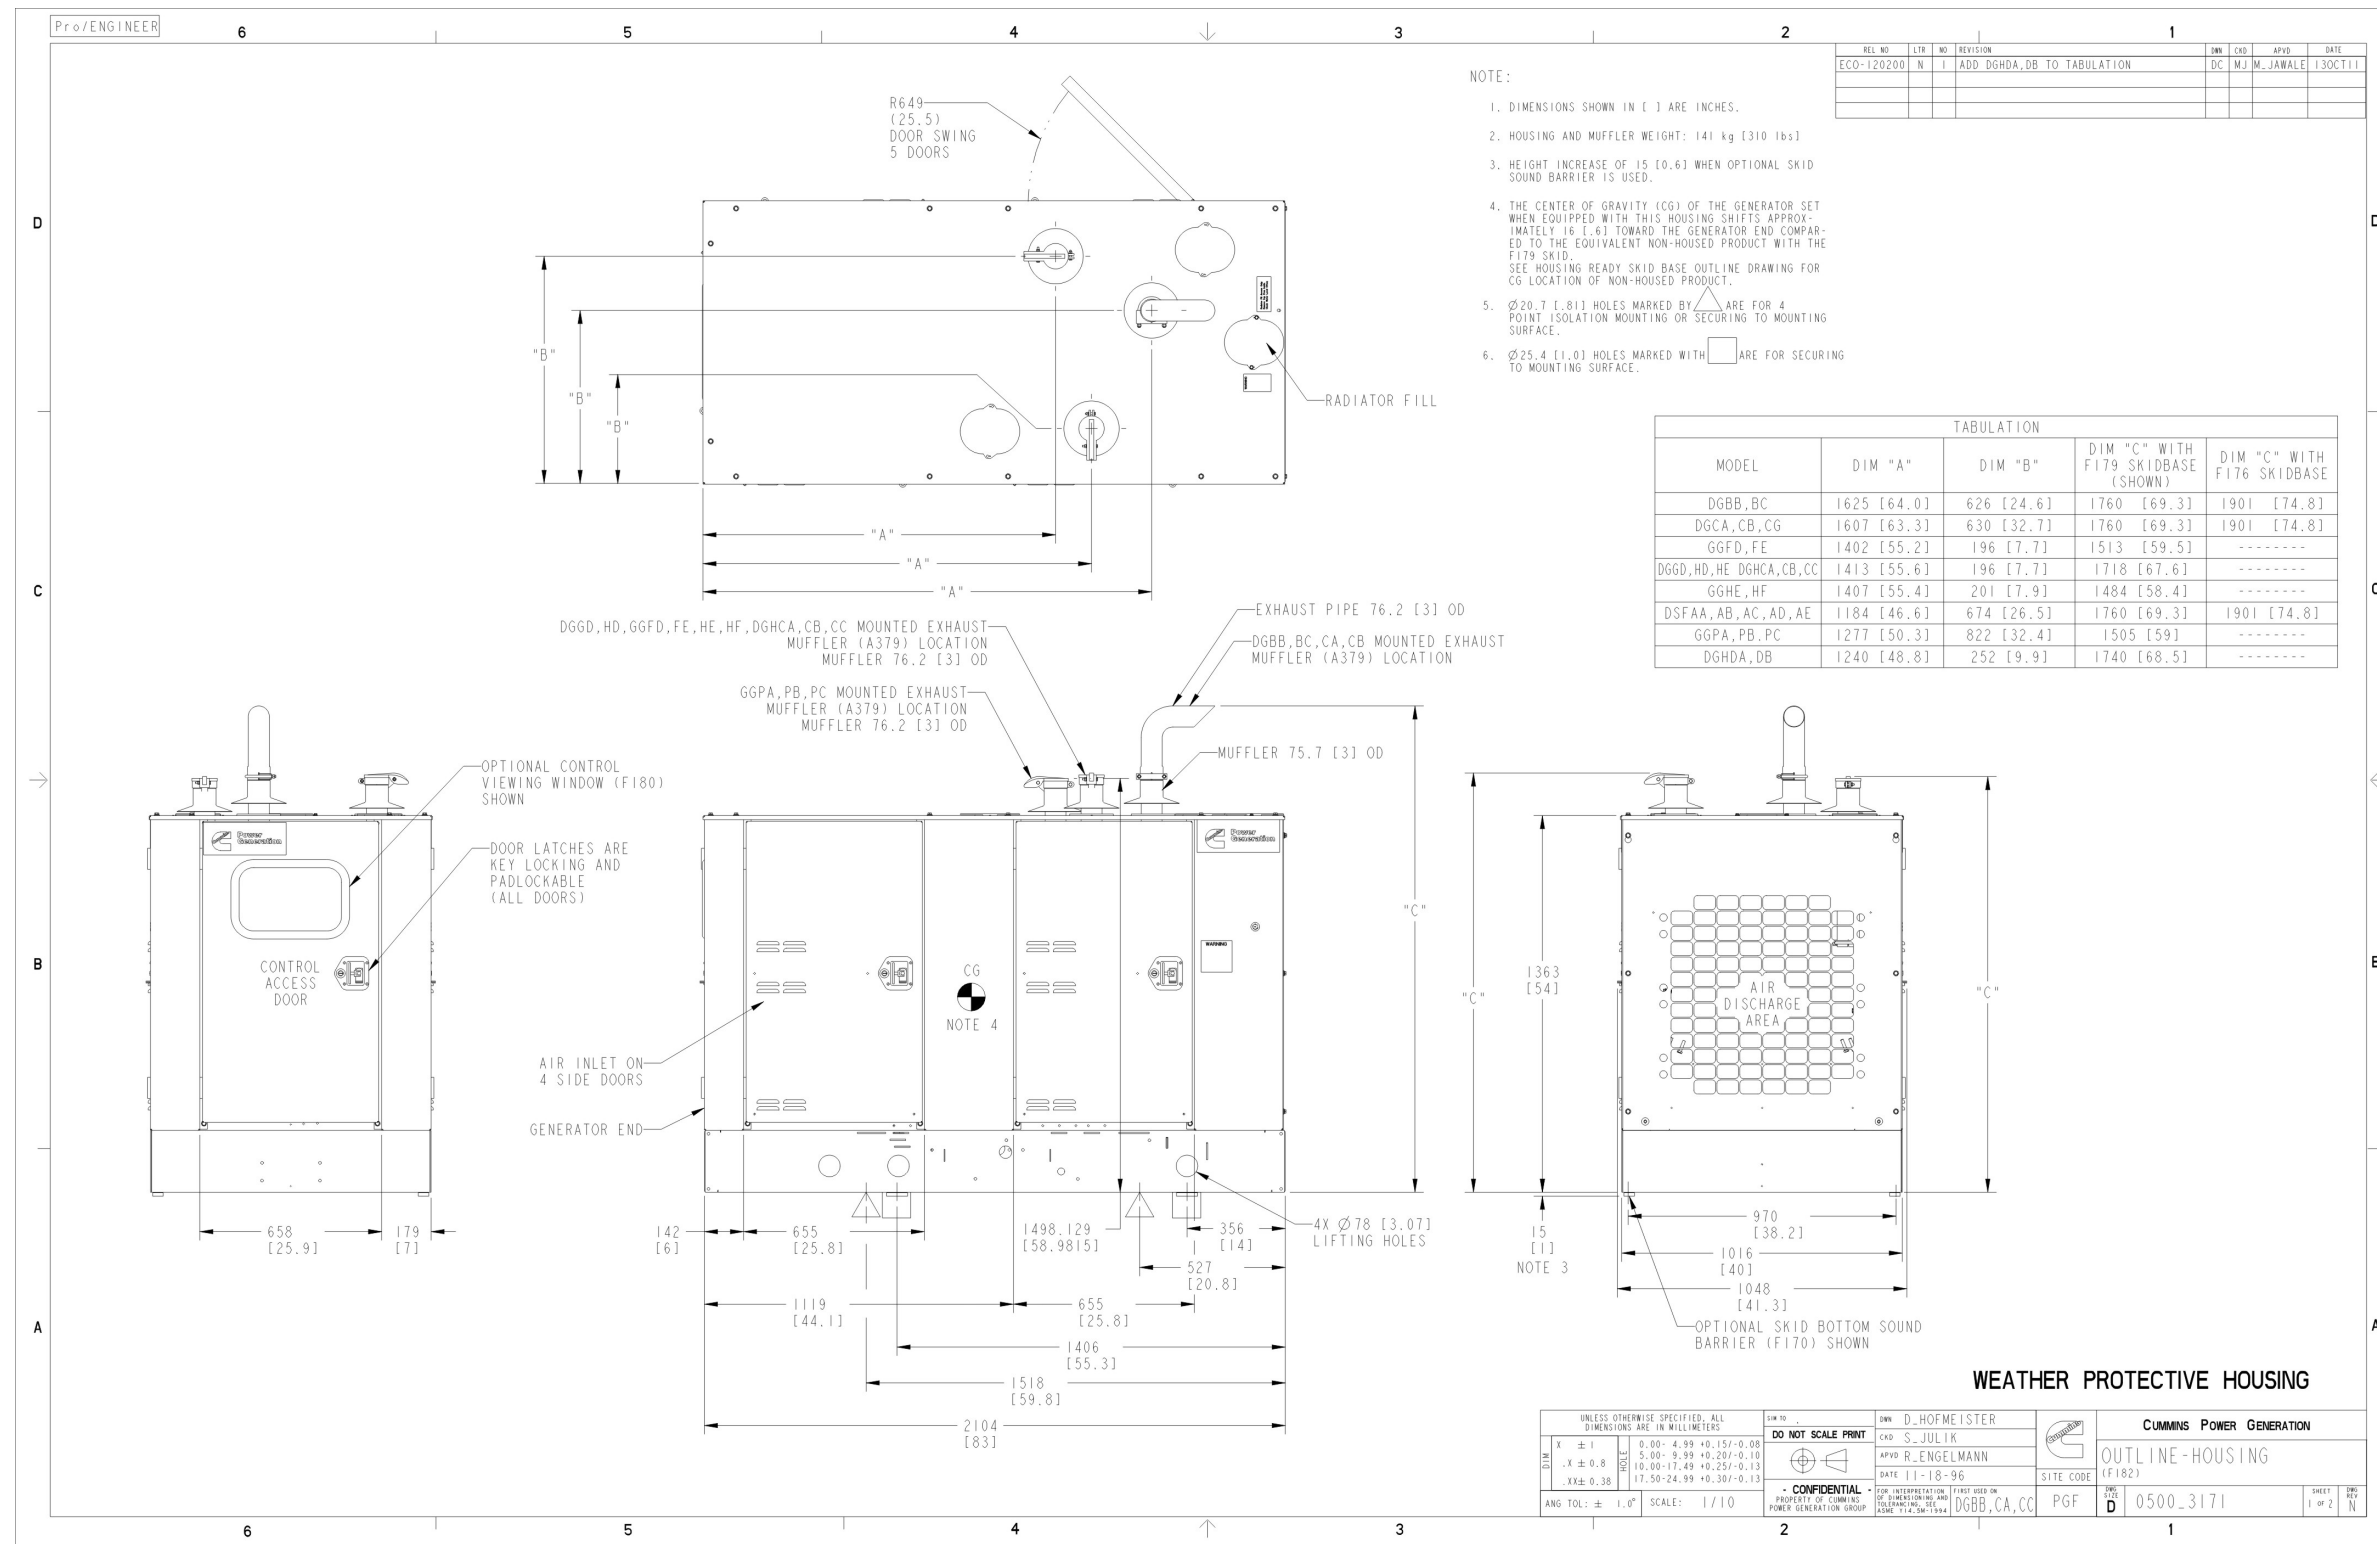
OUTLINE DRAWING (500-3171) SHEET 1
